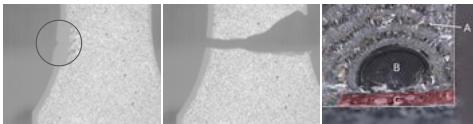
Initial crack arising from significant machining-flaw (left/ middle), confirmed by fracture mirror (B) within notch root (C) (right).
